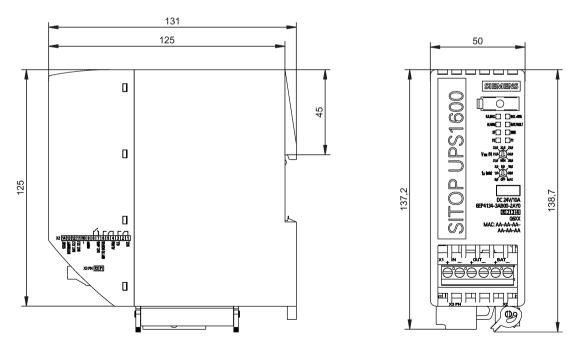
6EP4134-3AB00-2AY0, 6EP4136-3AB00-2AY0 dimensioned drawing
